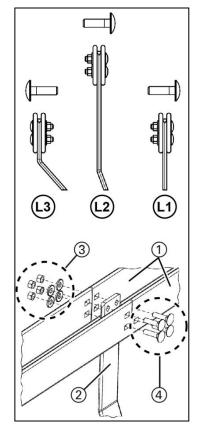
Busbar 2500 A, feeder ≤ 1250 A, Ur = 24 kV, end panel with mounted insulating shells
